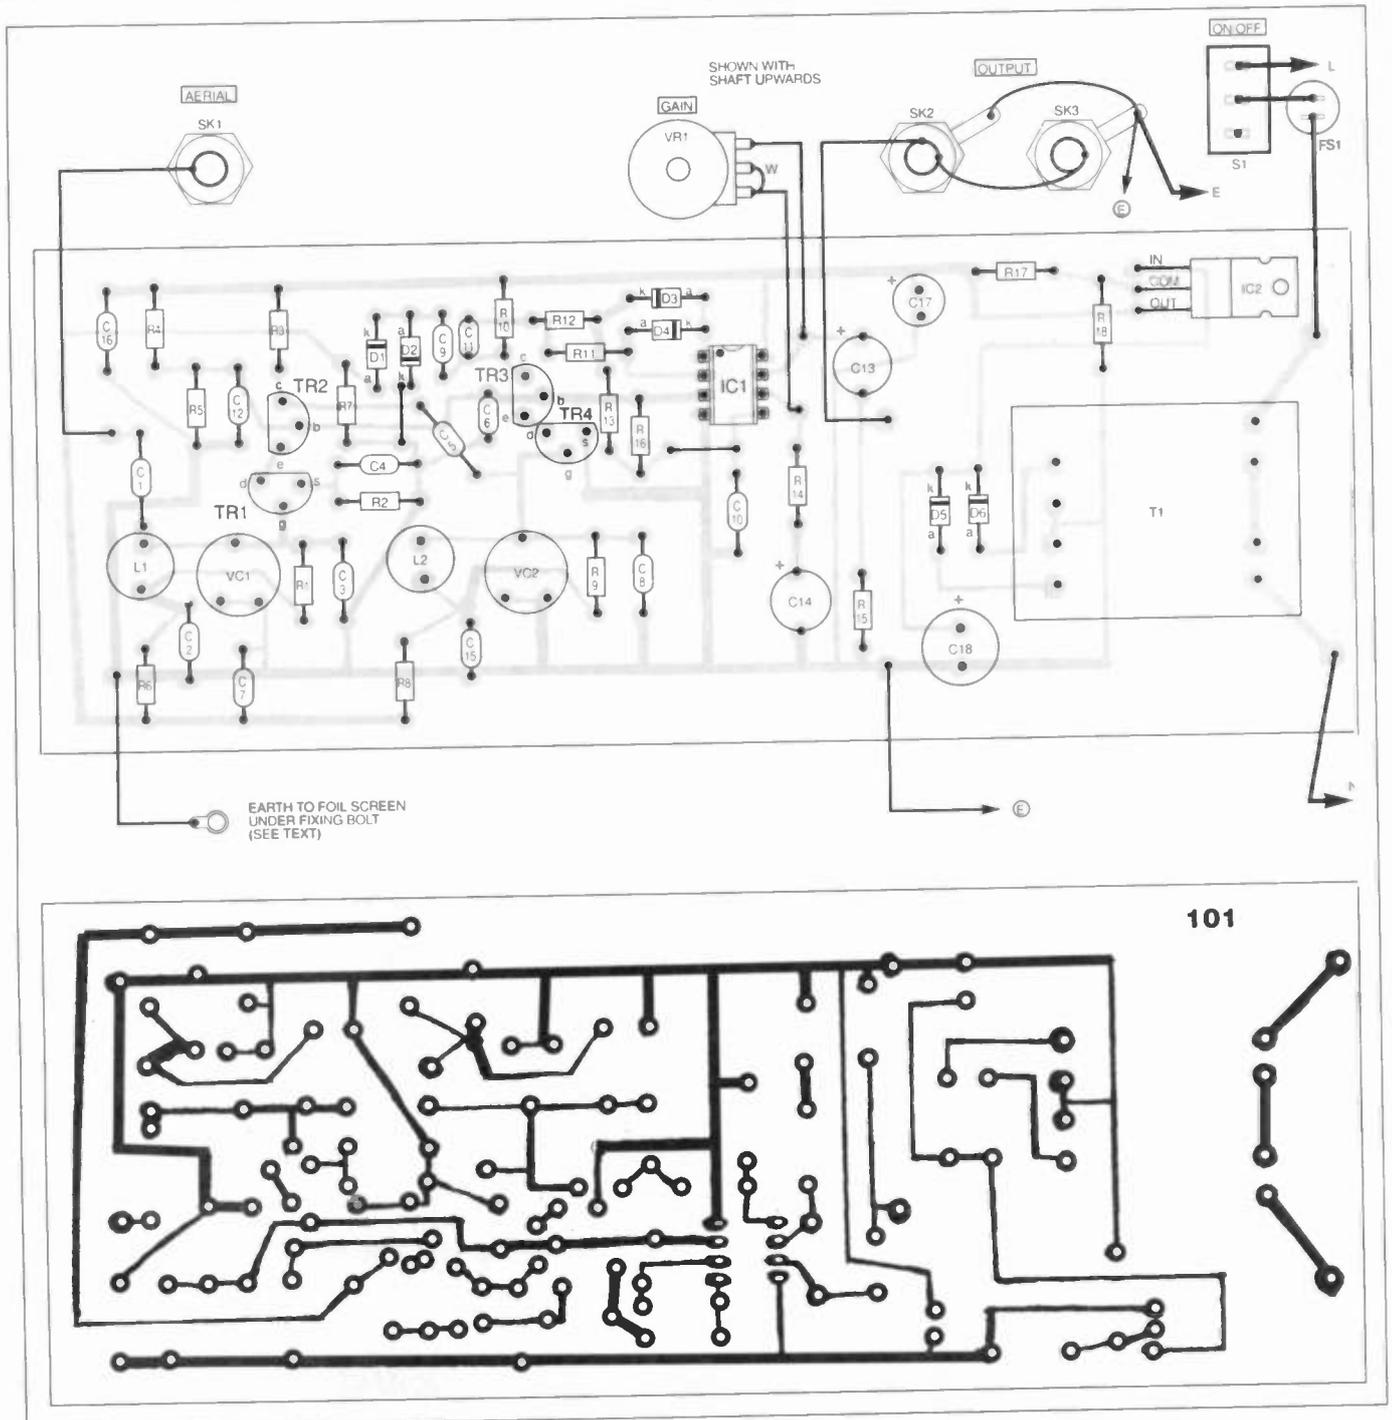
Component layout, interwiring and full size foil master for the Single-Station Radio 4 Tuner.
